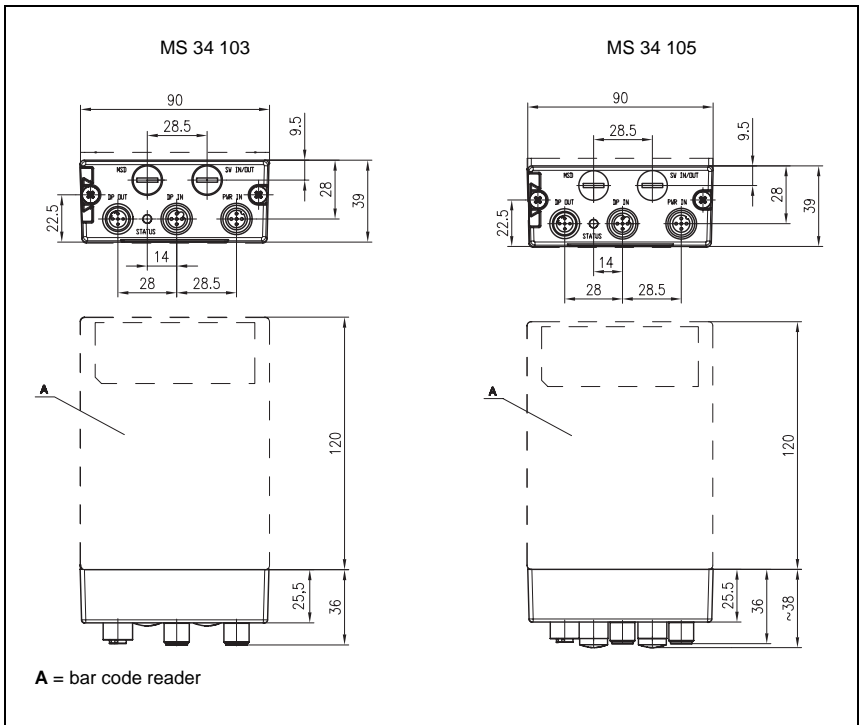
Dimensioned drawing MS 34 103 / MS 34 105
